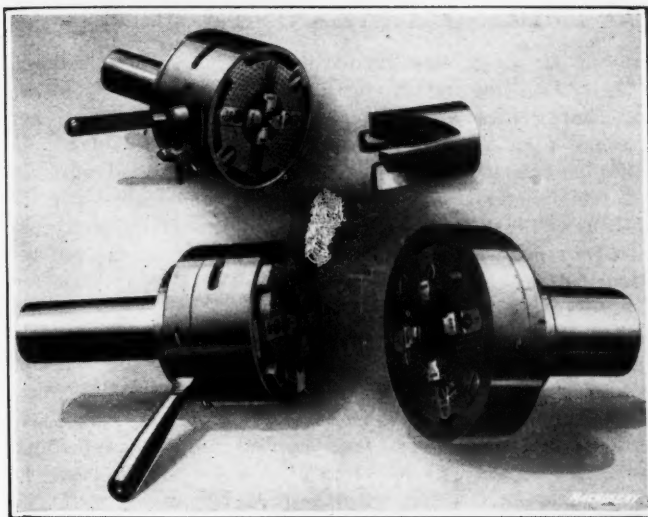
Automatic Opening Dies, Adjustable Chaser Die and Spring Screw Die used on Gridley Automatic Turret Lathes
